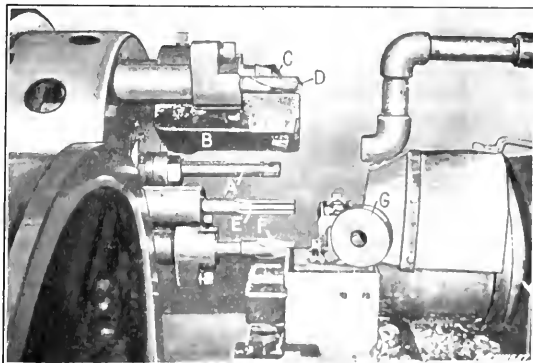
Making Redrawing Die Blanks in a Cleveland Automatic Screw Machine
